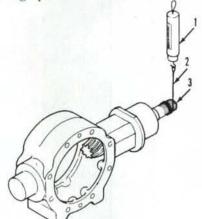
Wrap a cord (2) around pinion shaft (3) and use a spring scale (1) to check pinion rolling torque. Refer to text for adjustment.
